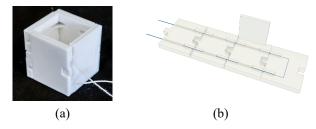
(a) Box printed flat, assembled by pulling threads. (b) Transparent view showing internal thread routing.
